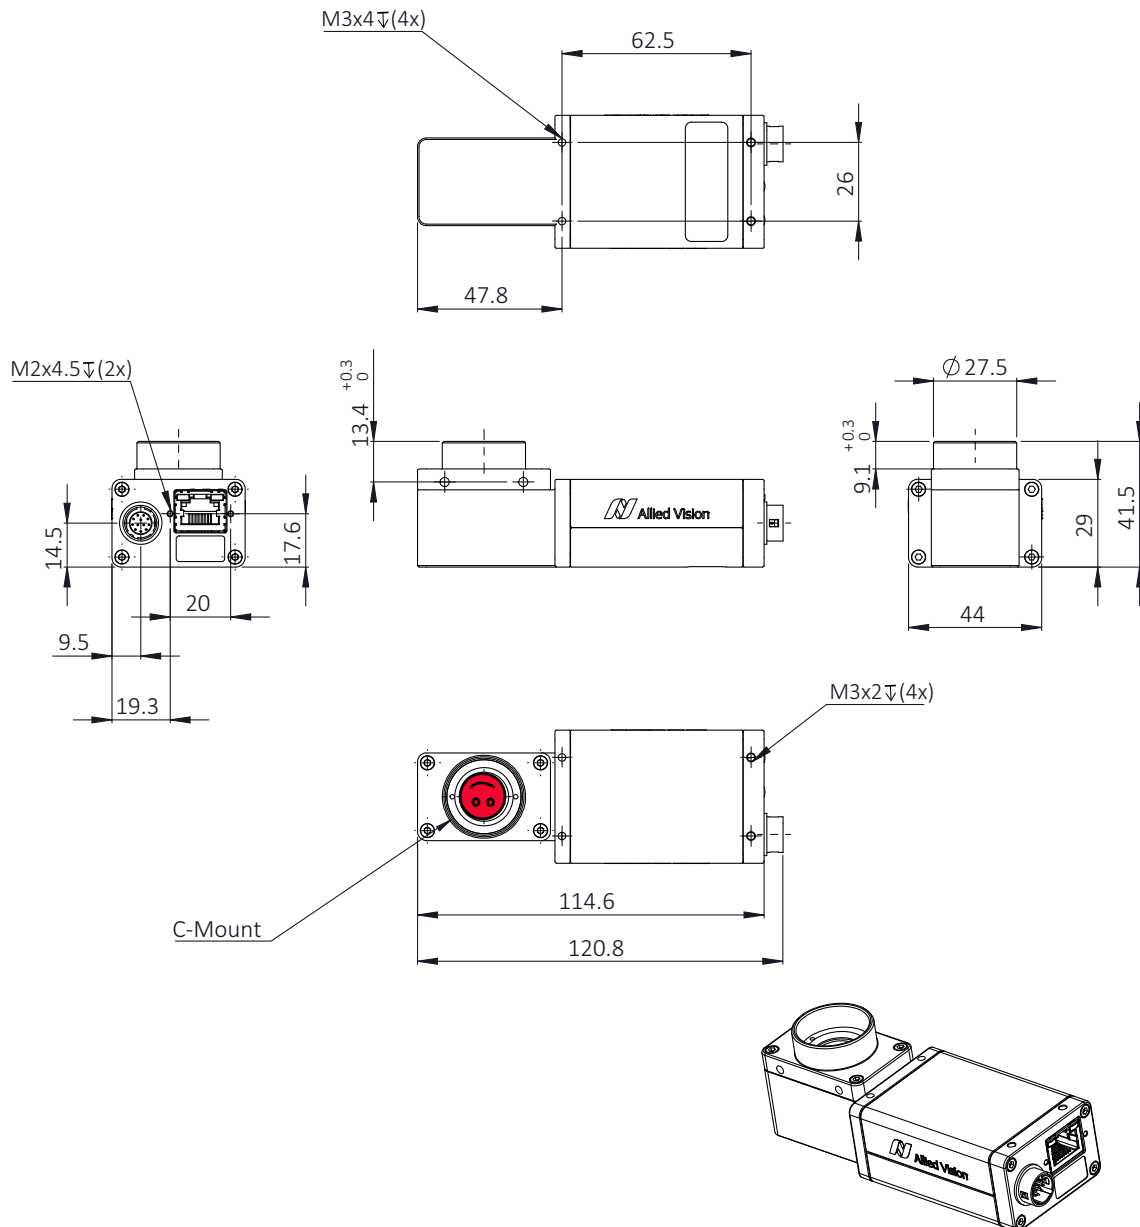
Manta type B W90 S90 housing dimensions (including connectors)
